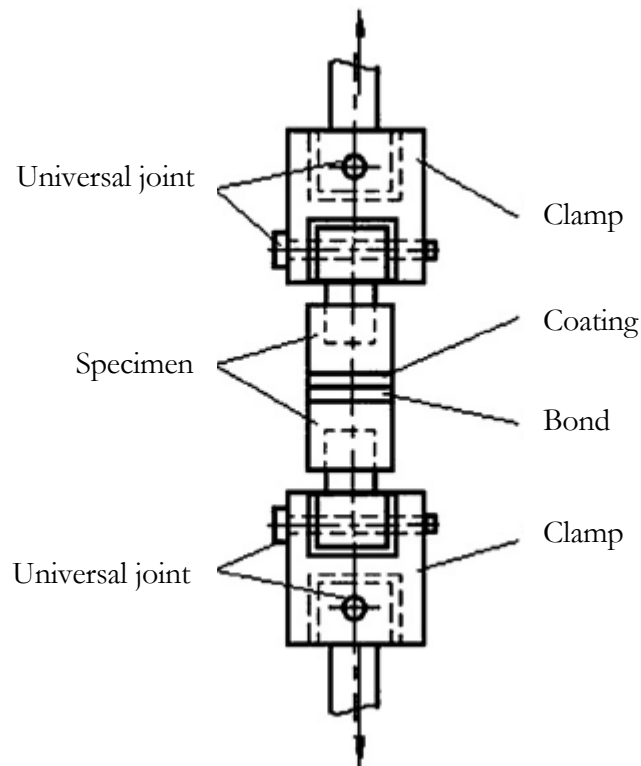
Fixture for pull test [by ASTM standard tests]
